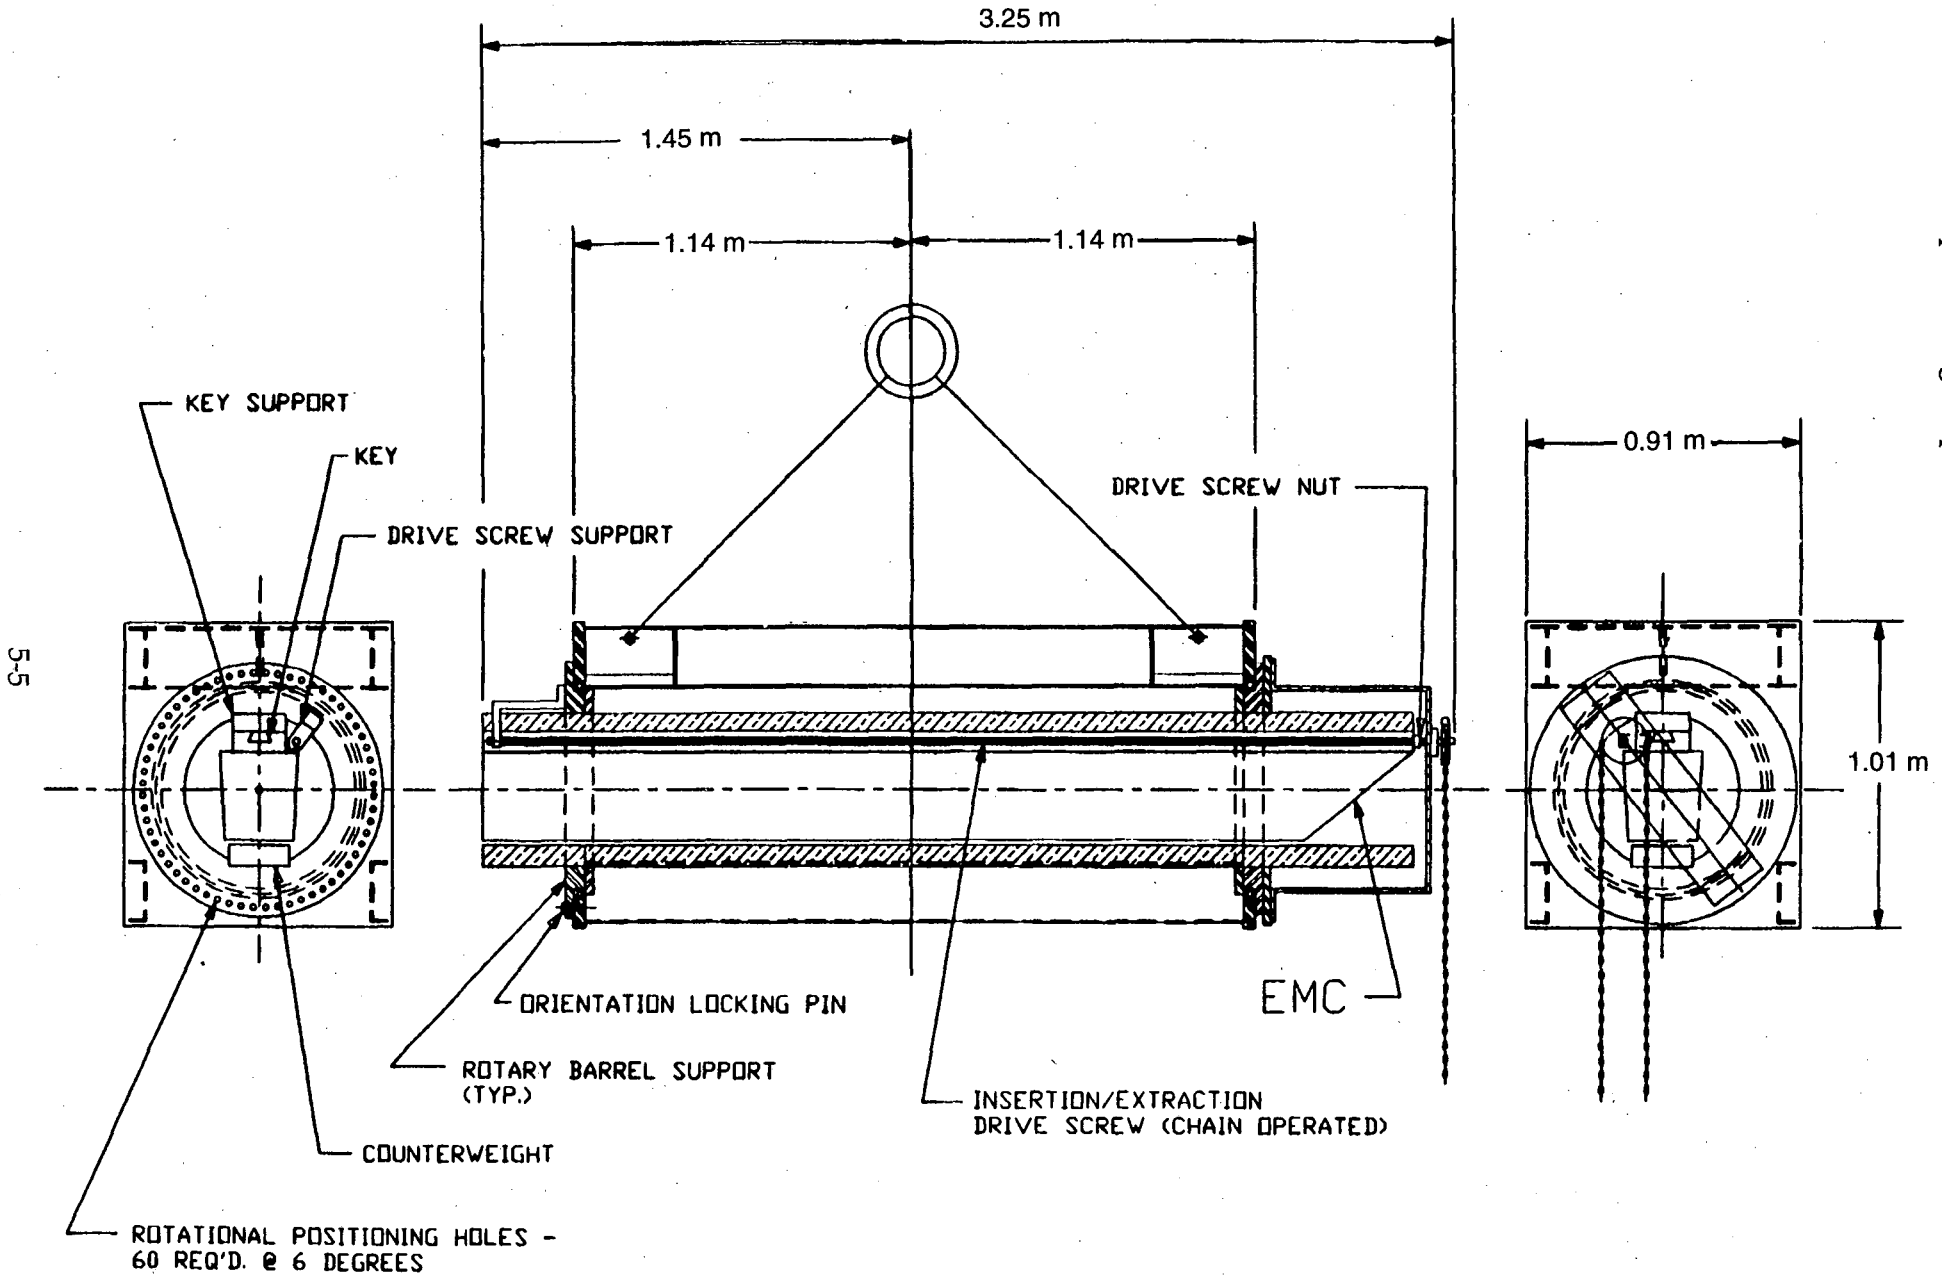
A-4. The installation fixture used to insert modules of the EMC barrel.
